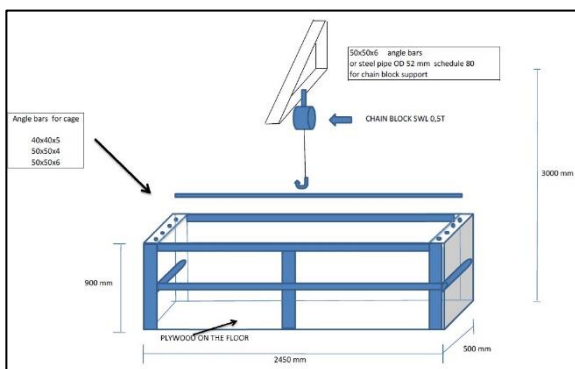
Sketch of the Company-recommended storage and securing arrangements for spare steel plates
